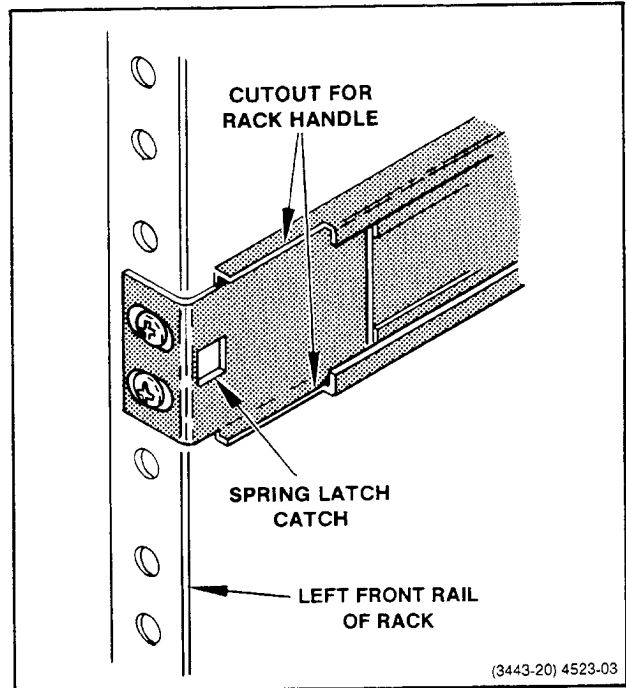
Spring Latch Catch and Cutout for Rack Handle.
